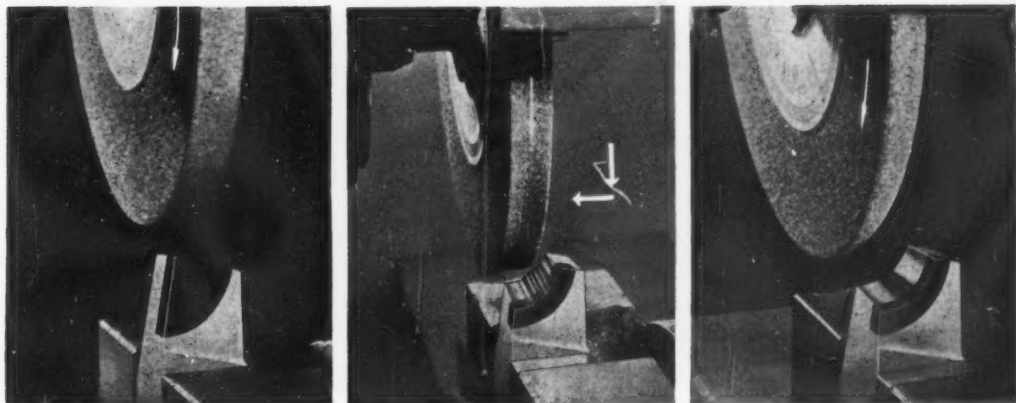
(left) Set-up for Grinding the Concave Form Tool. Fig. 11. (centre) Method of Rough Grinding. Fig. 12. (right) The Tool is Finished with a Formed Wheel
